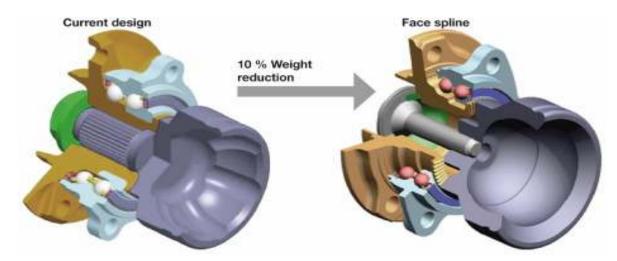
Wheel bearing with face spline design compered with actual internal gear teeth design
